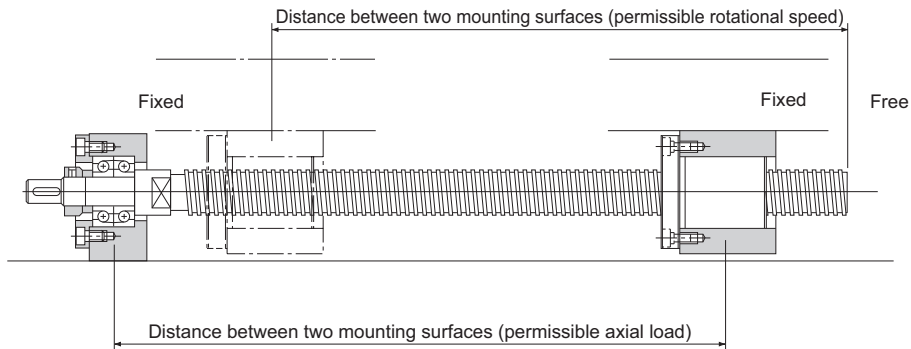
Screw Shaft Mounting Method: Fixed - Free
